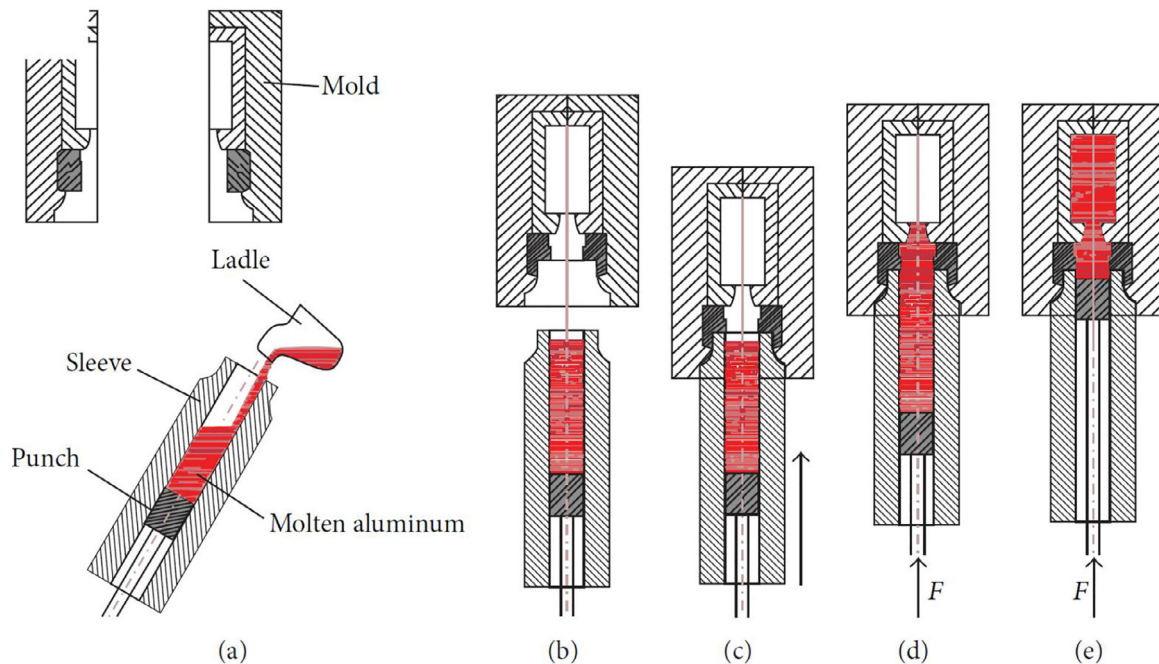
Schematic illustration showing the indirect squeeze casting process: (a) molten alloy was poured into heated sleeve after the sleeve has tilted, (b)-(c) sleeve was moved back to its original position and rose to cooperate with mold, (d) punch rose fast until molten alloy got to flow gate, and (e) molten alloy was slowly filled to cavity and solidified under pressure [88].
